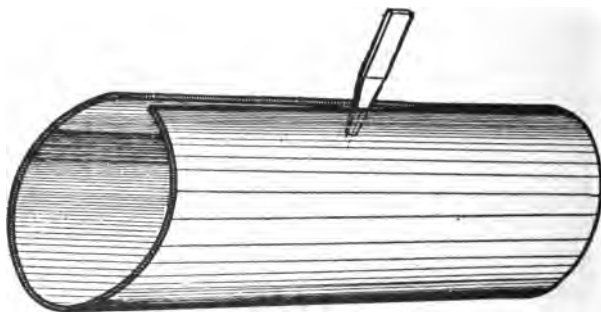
Method of preserving the correct alignment of the edges of sheets during the welding operation.
